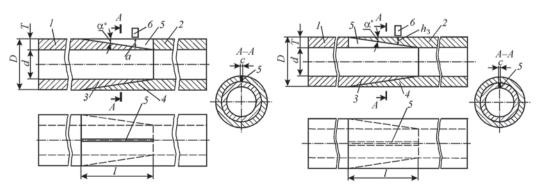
Composite RS for simulation of surface (a) and subsurface (b) cracklike defects in cylindrical TO: 1, 2 — RS parts; 3, 4 — conical end sections of RS part; 5 — defect on the outer (a) and inner (b) conical sections; 6 — ECP
